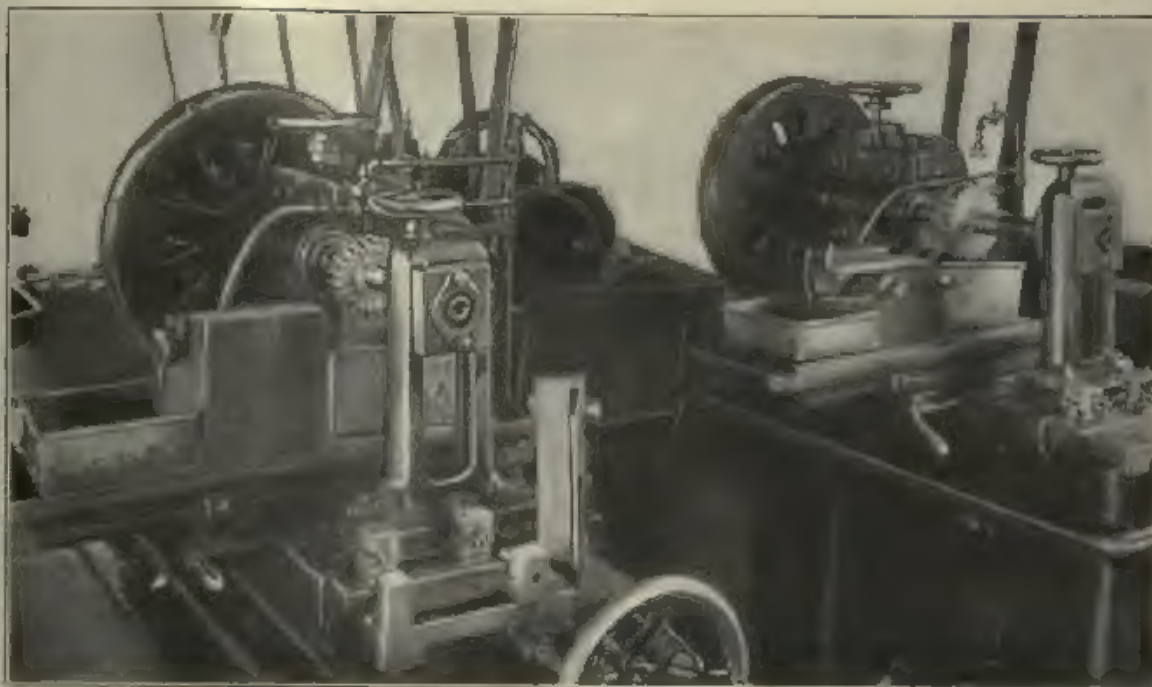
MILLING THE SIDES OF THE RECEIVER
